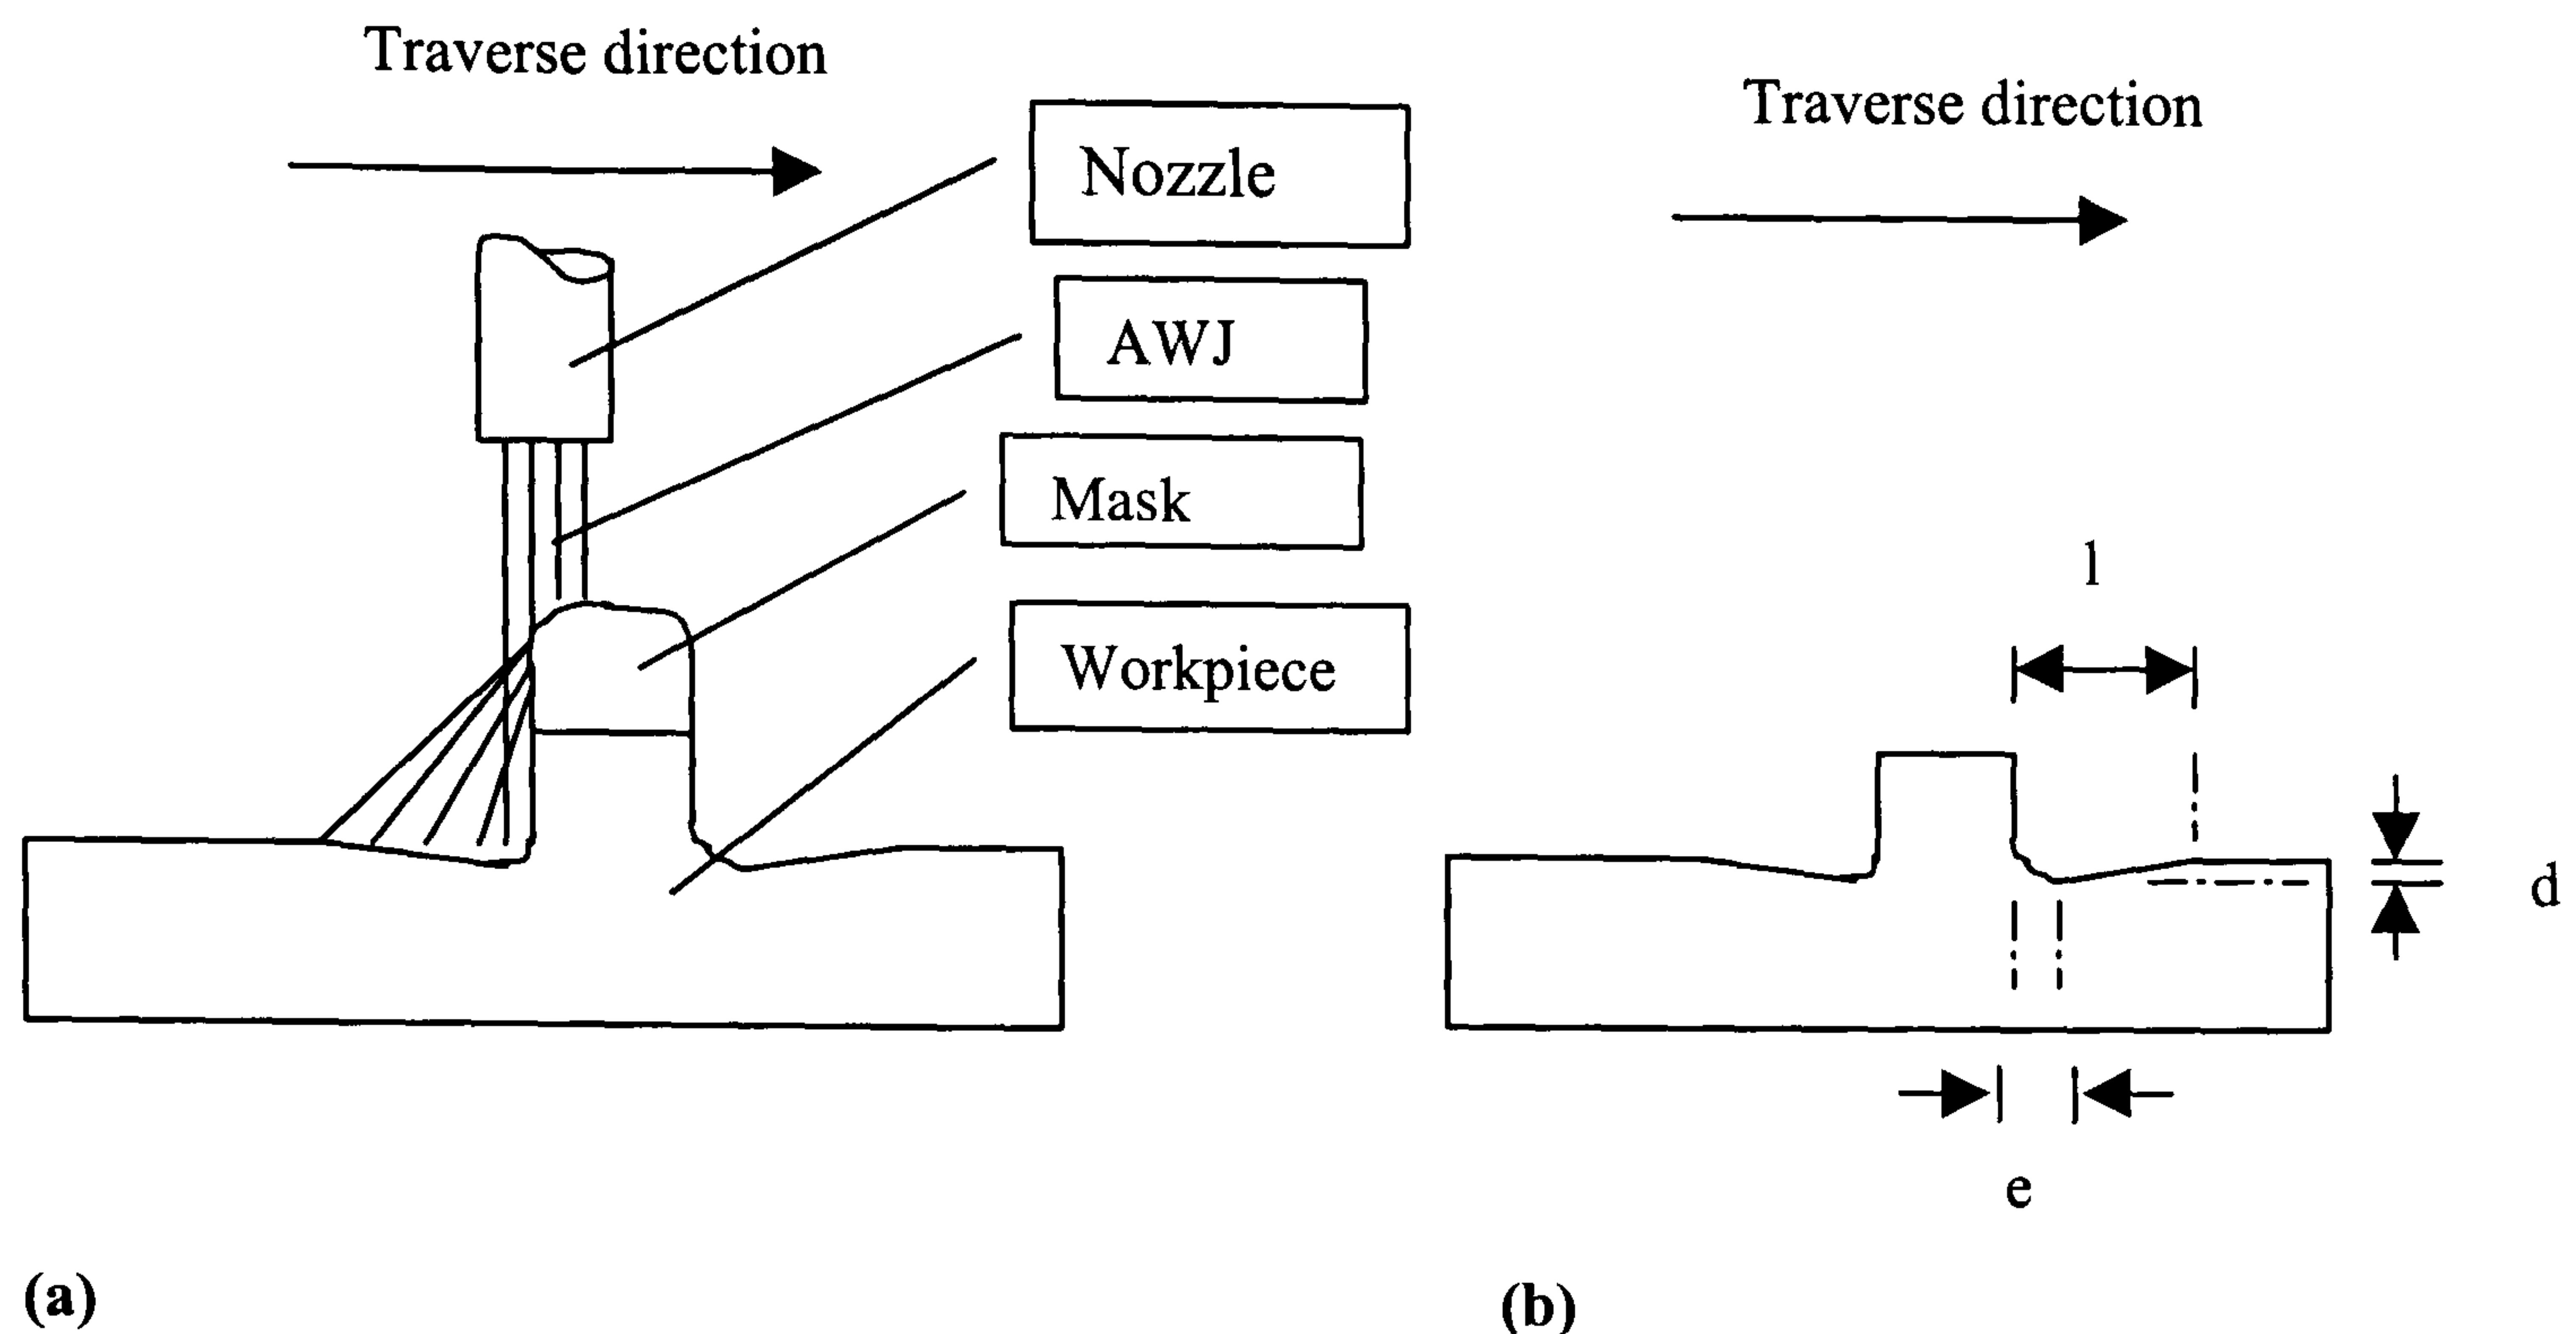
Secondary machining effects when AJW-CDM with masks. (a) The wear process of mask and work piece during a masked milling operation. (b) l , d , and e , indicates dimensions of form errors caused by secondary machining due to jet deflections [Ojmertz, 1996].
